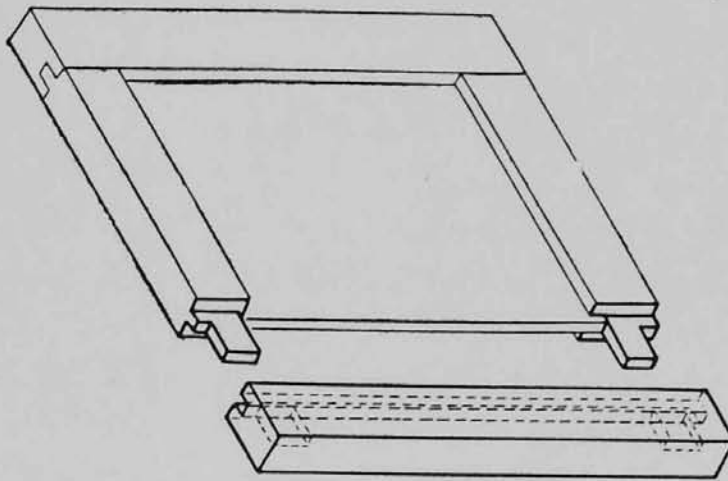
Haunched mortise and tenon joint used in doors.
